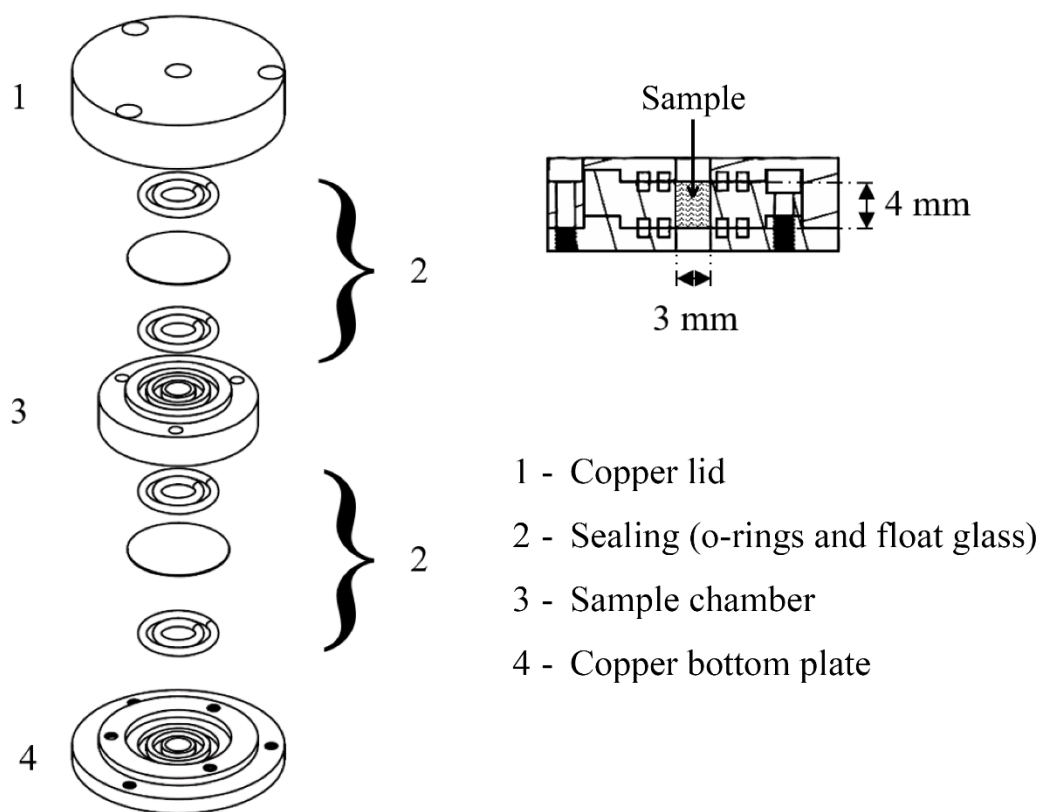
Schematics of the sample holder - left: exploded view, right: assembled view (central sample area filled with a wavelike pattern)
